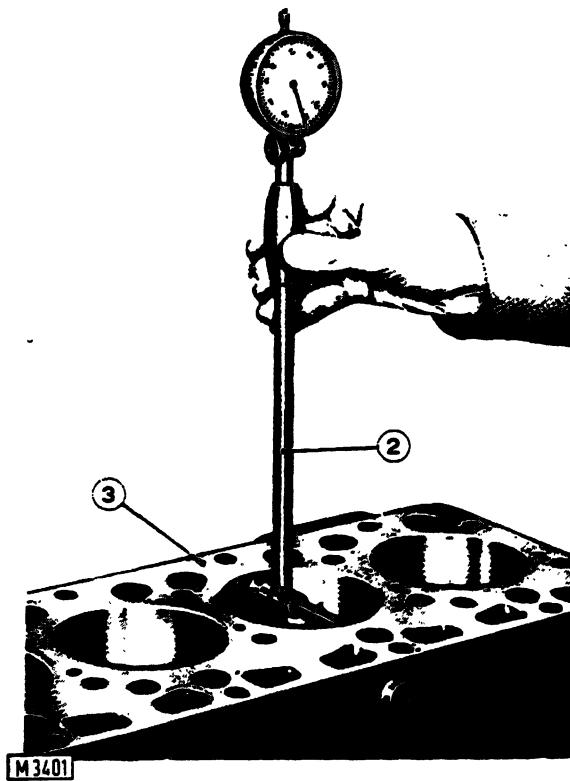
Checking cylinder sleeve diameter with dial gauge.
